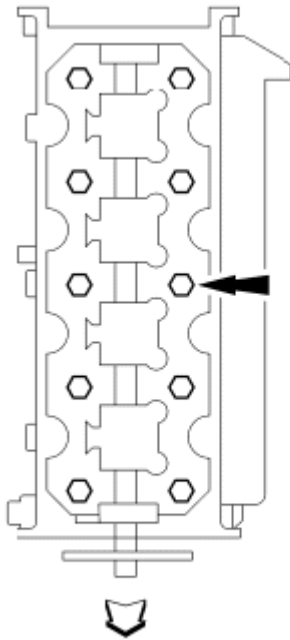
Identifying Cylinder Head Remover/Installer (303-572)
